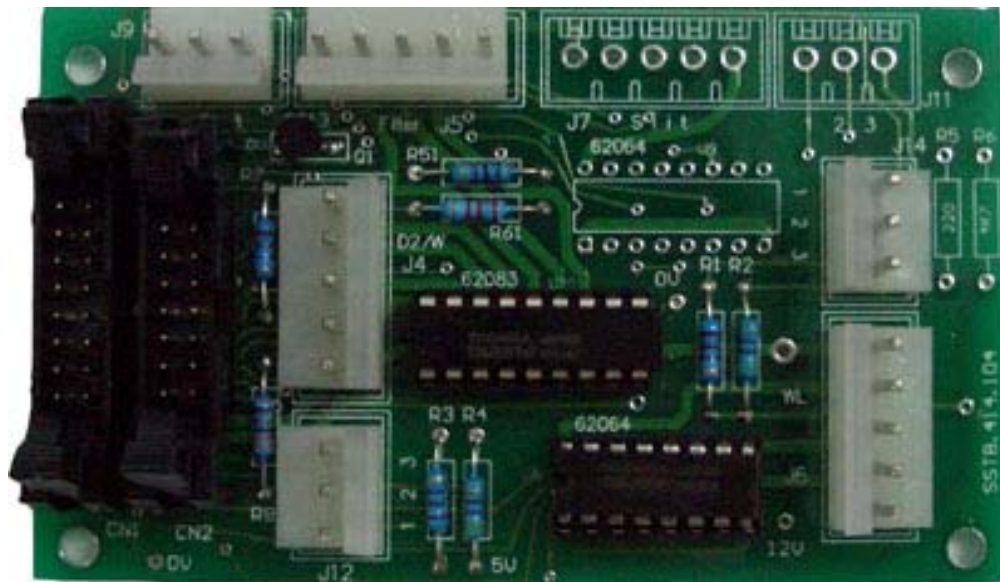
Layout of UV-2802, UV-2802PC, UV-3802, UV-4802 Drive PCB
